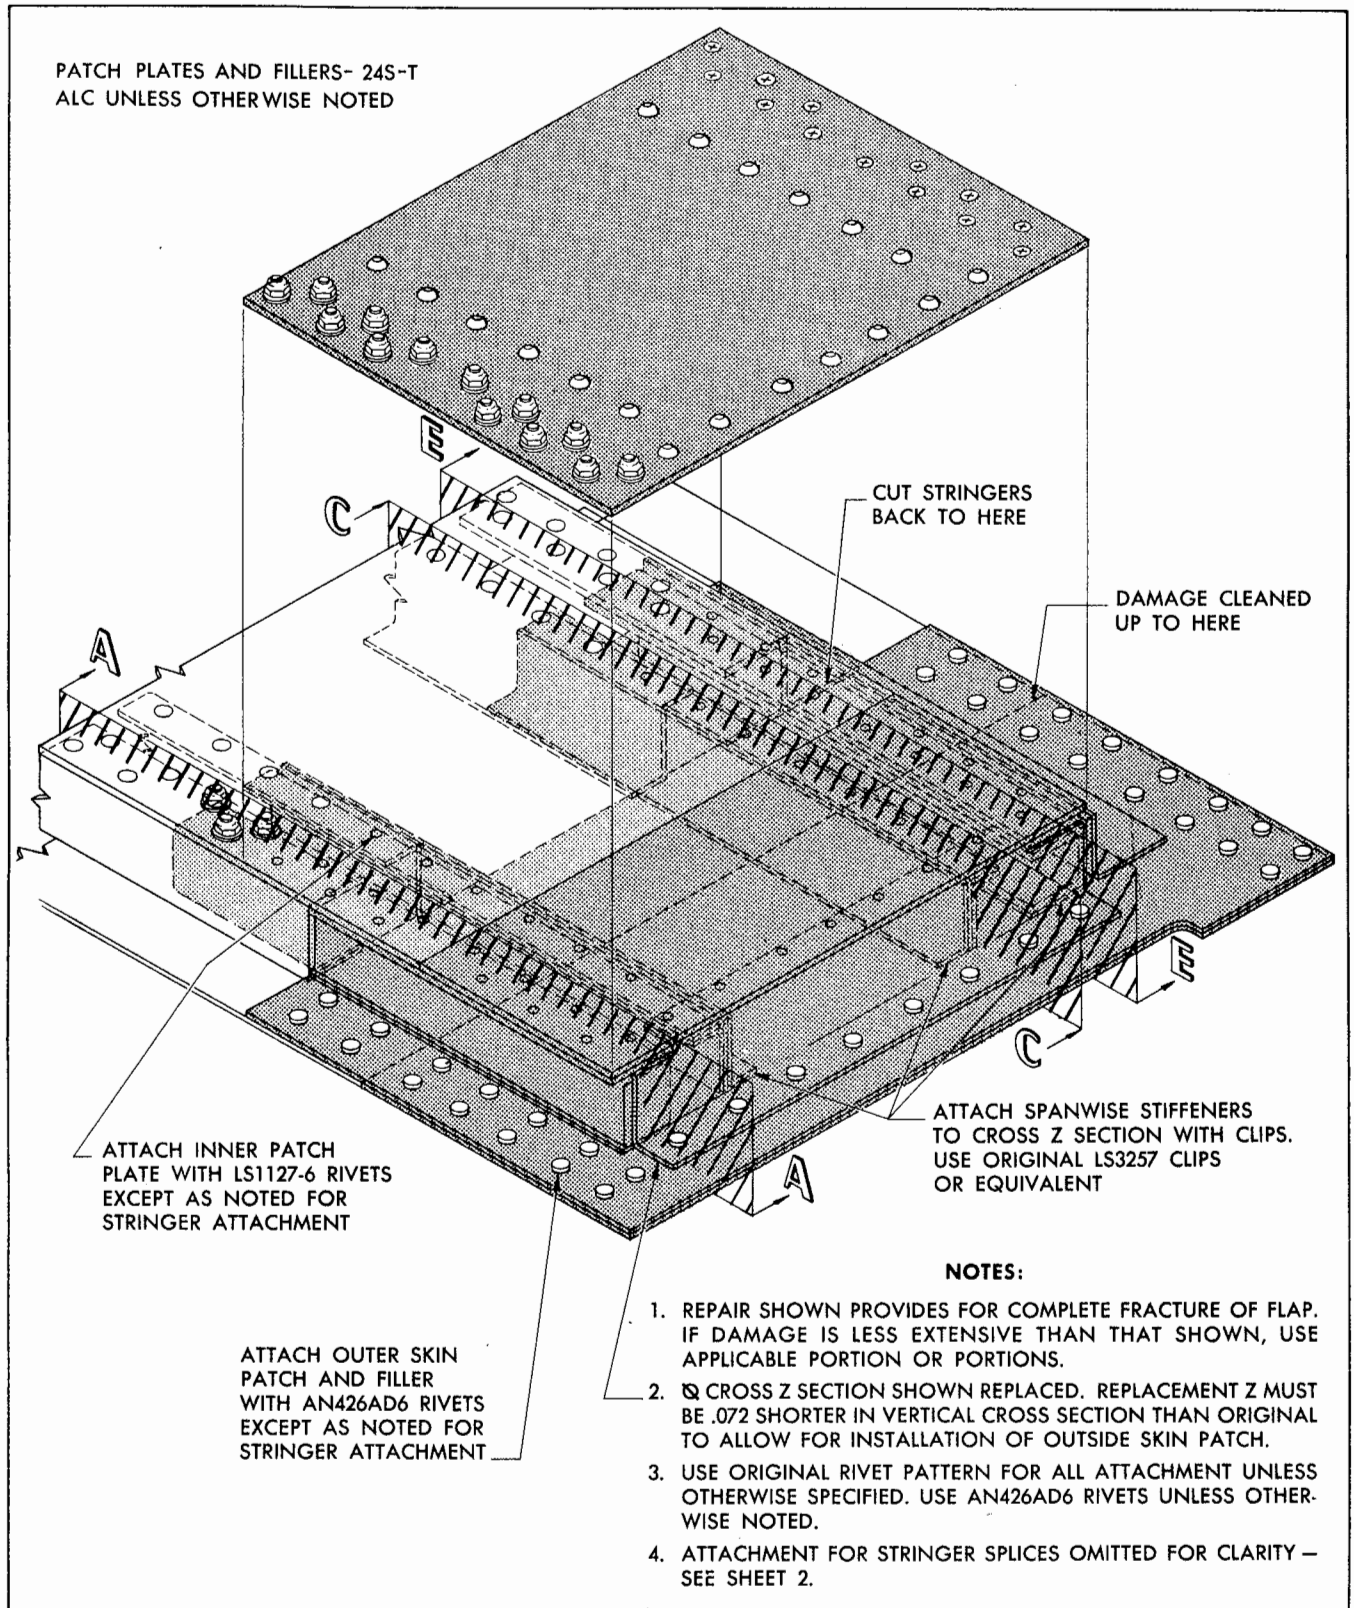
A (Sheet 1 of 2 Sheets) — Dive Flap Repair, P-80B and P-80C Airplanes
